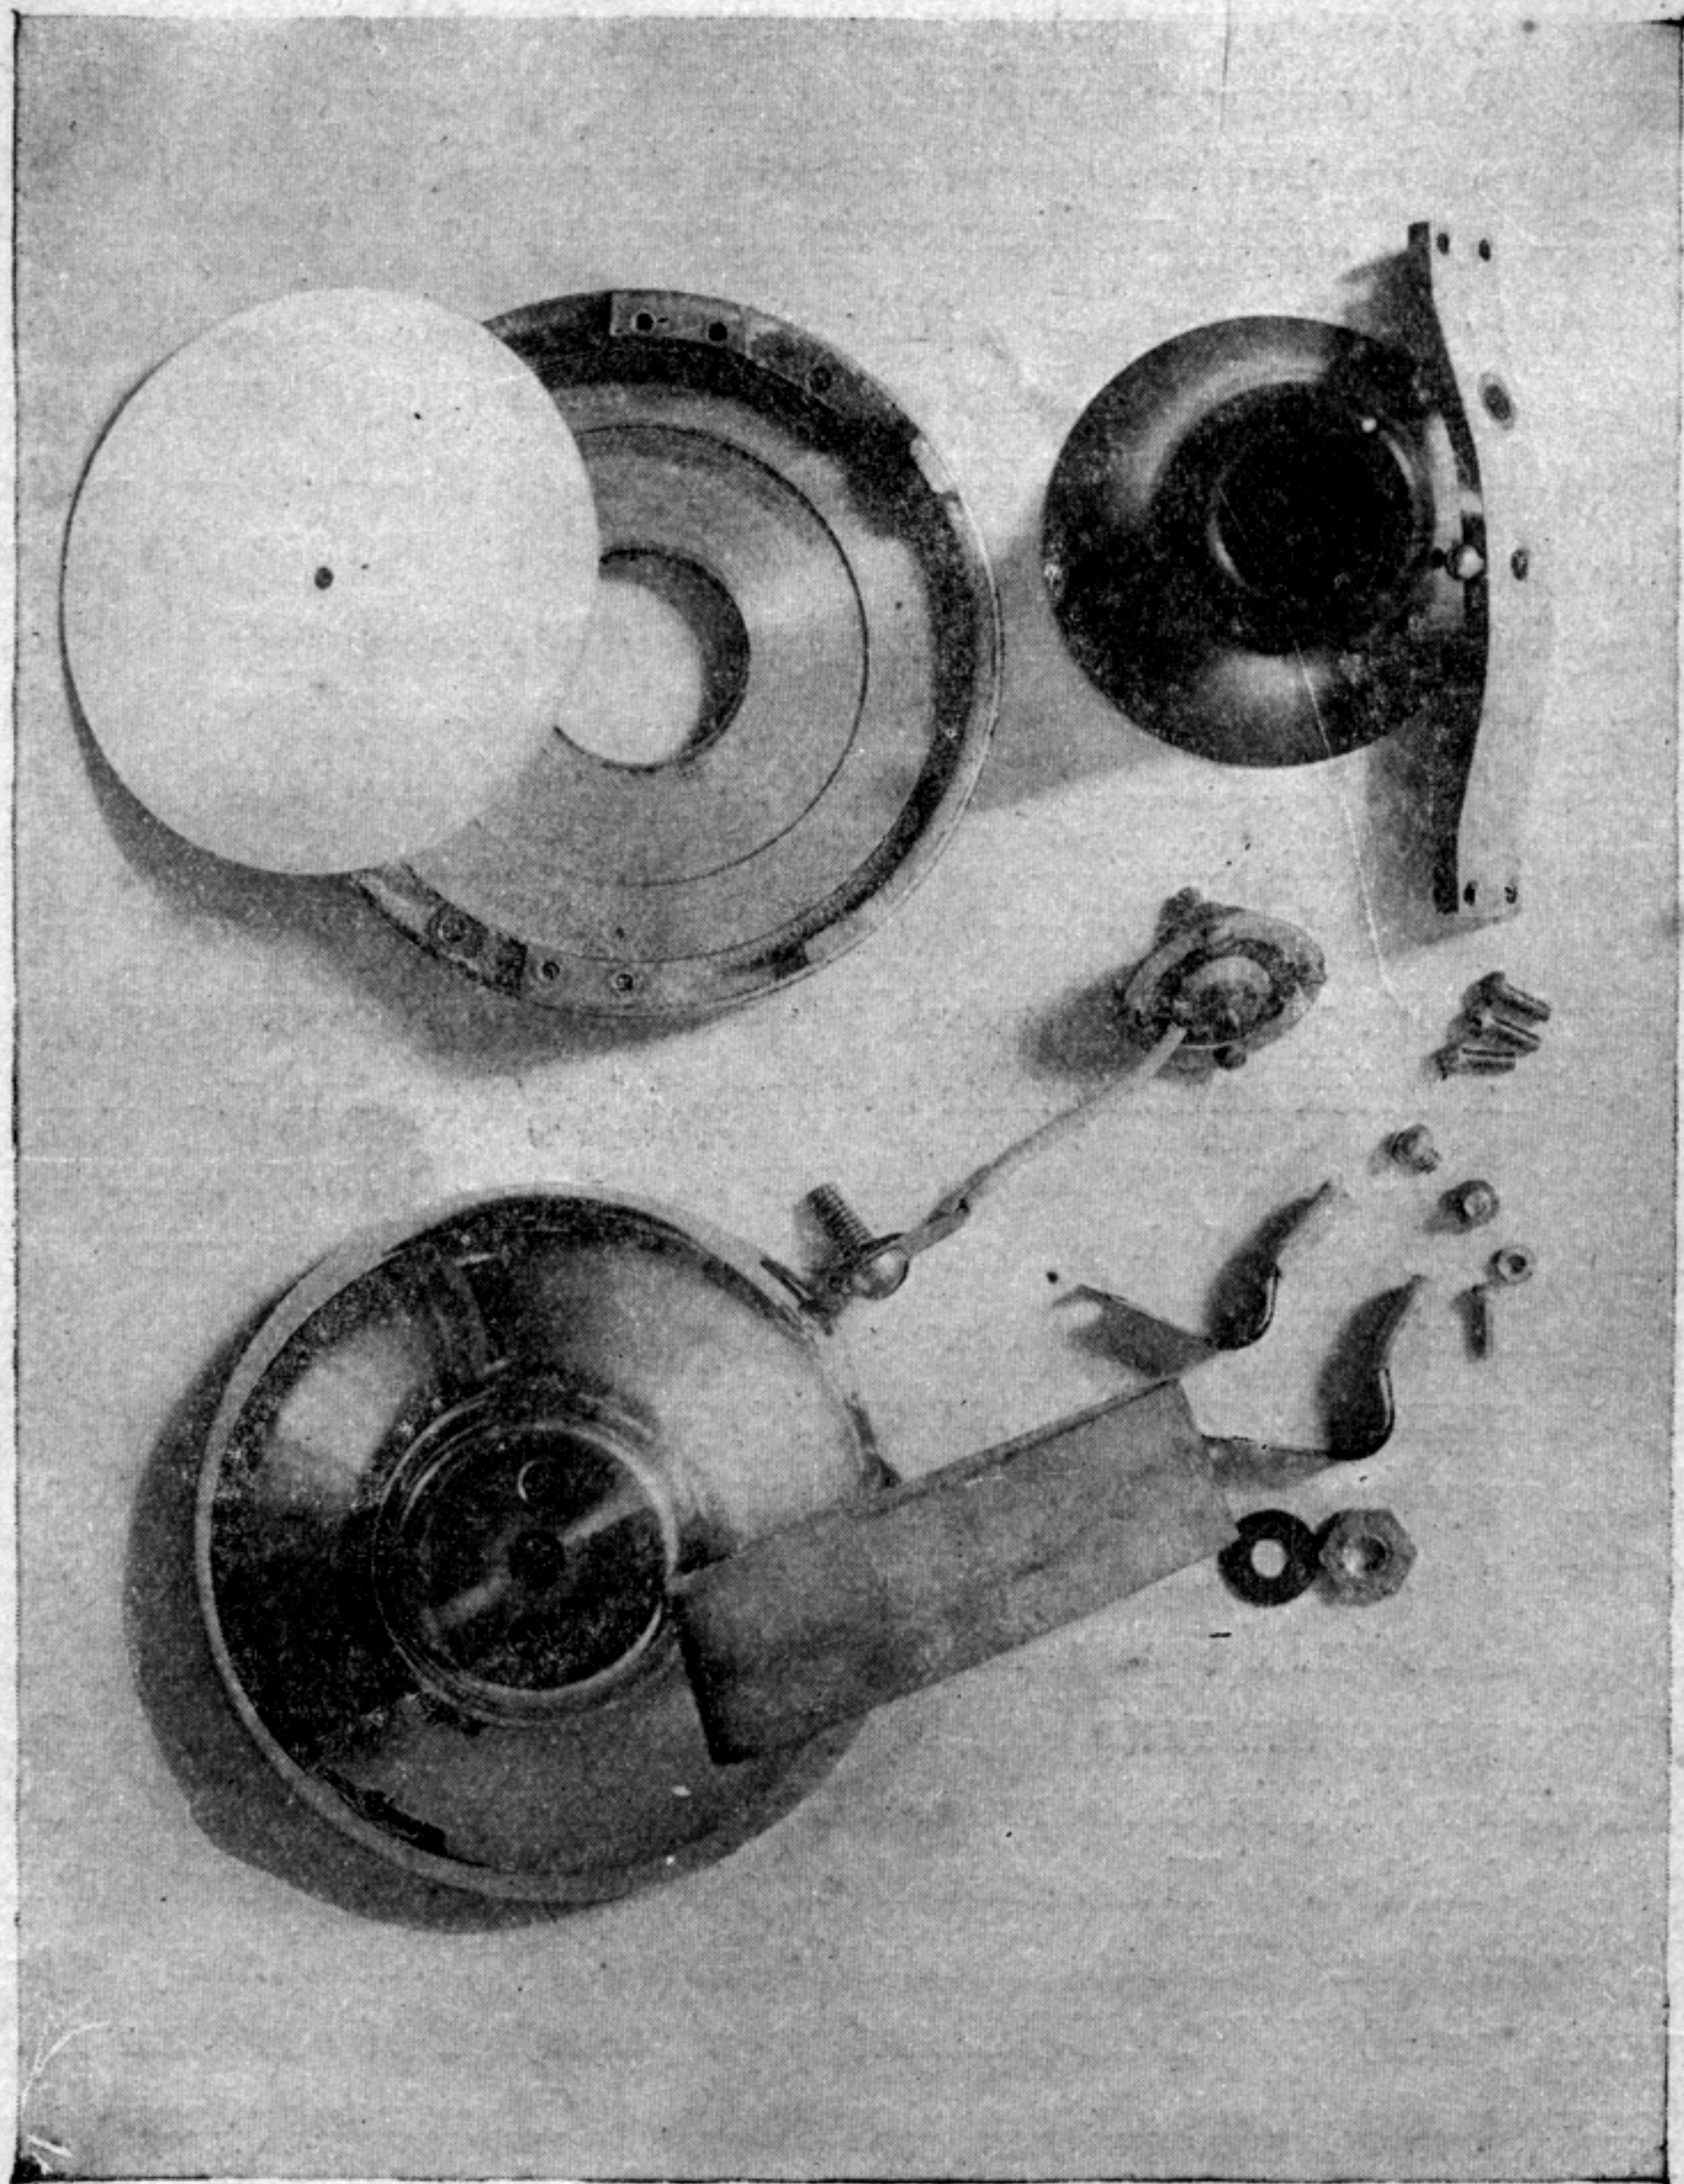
INTENSIFYING TRANSMITTER DISSECTED.
